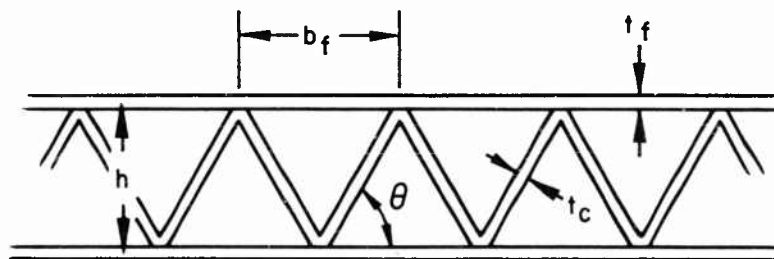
Cross-Sectional Geometry of Truss-Core Sandwich Wide Column
